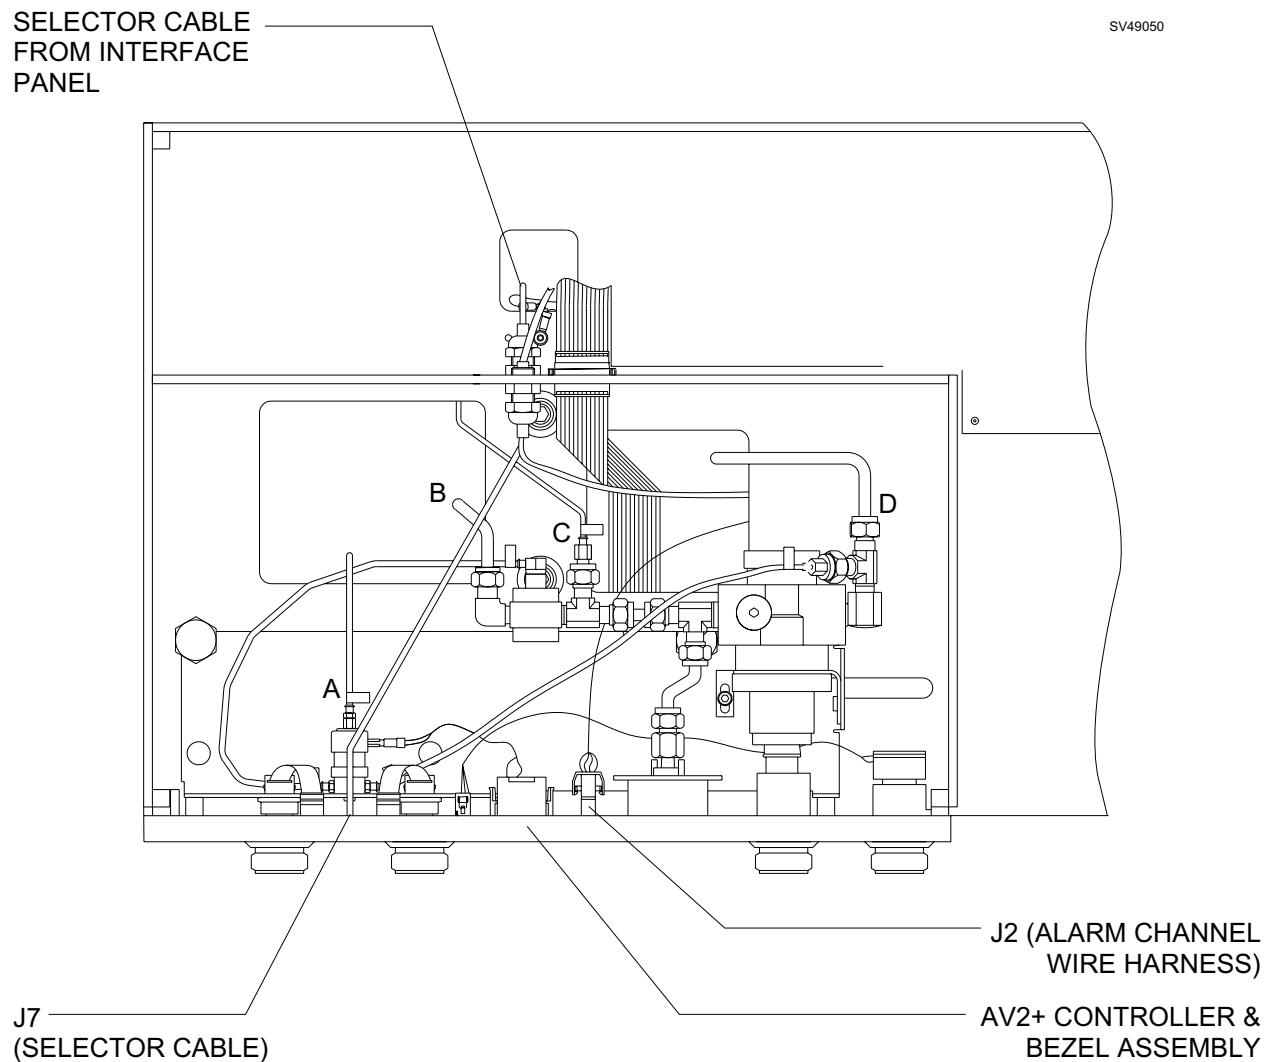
A: AV-2+ VENTILATOR CONTROLLER ASSEMBLY
